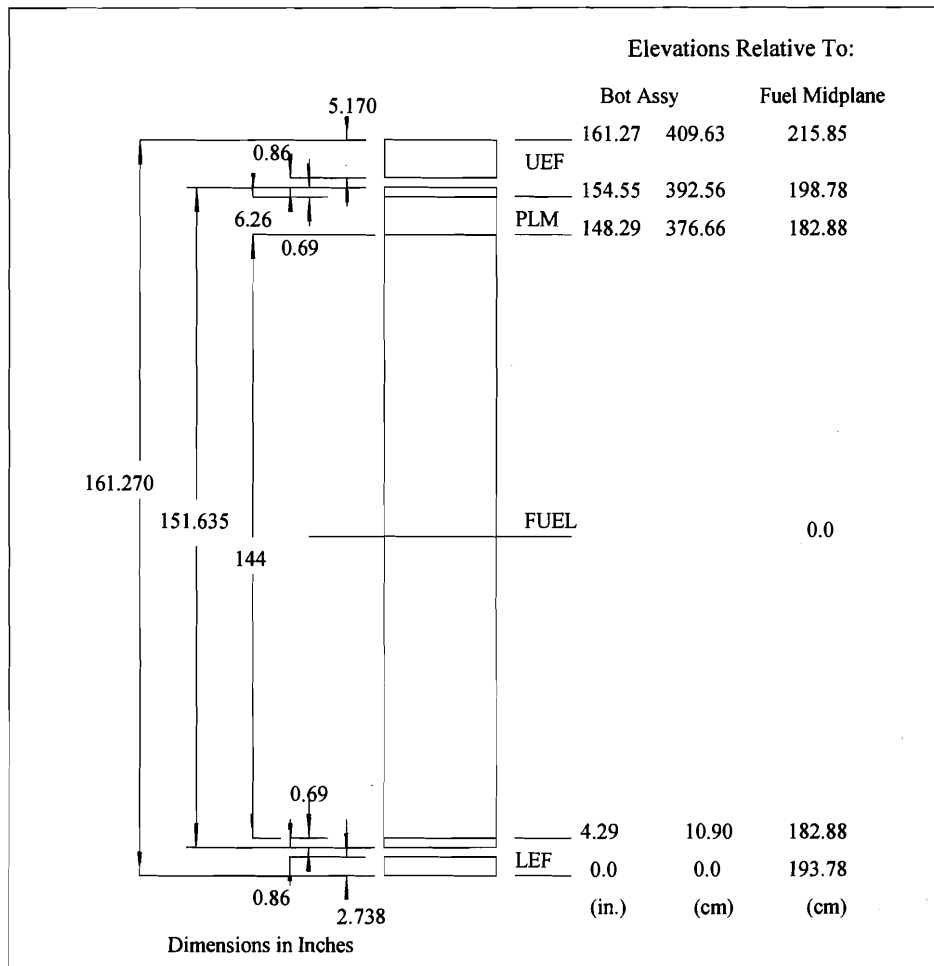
WE 17×17 Assembly Geometrical Parameters
